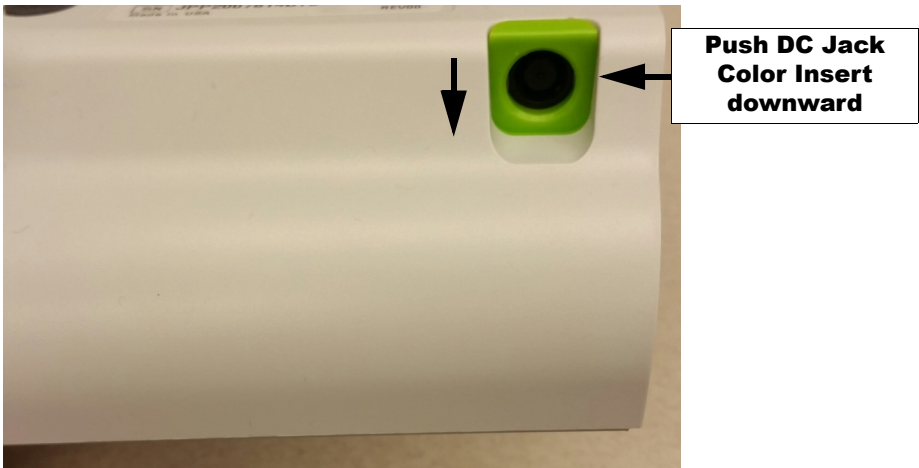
BOTTOM ENCLOSURE FLIPPED TO REMOVE COLOR INSERT/DC CABLE
